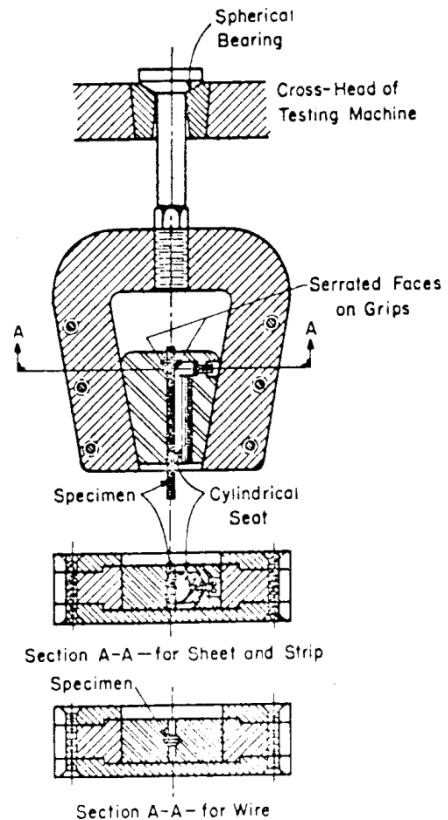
Gripping Devices for Sheet and Wire Specimens
